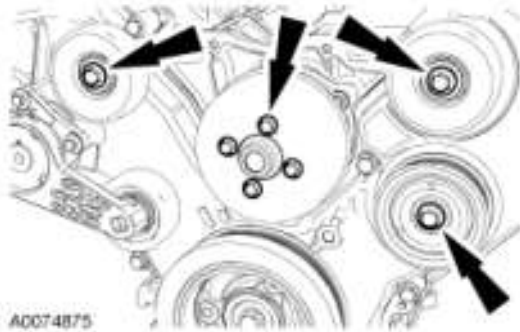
Locating Coolant Pump Pulley And Accessory Drive Belt Idler Pulley Bolts
